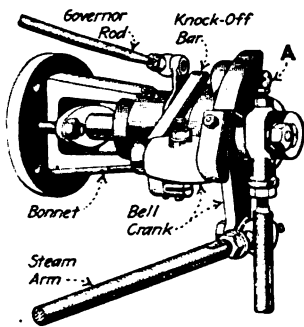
Vilter Corliss-engine trip gear showing knock-off bar.
